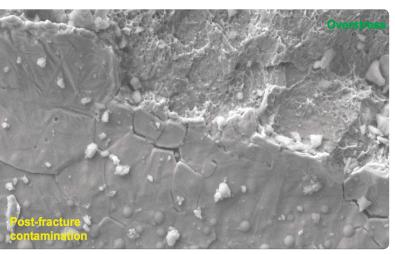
SE micrograph of the right propeller shaft fracture surface, showing areas of overstress and post-fracture surface contamination.
